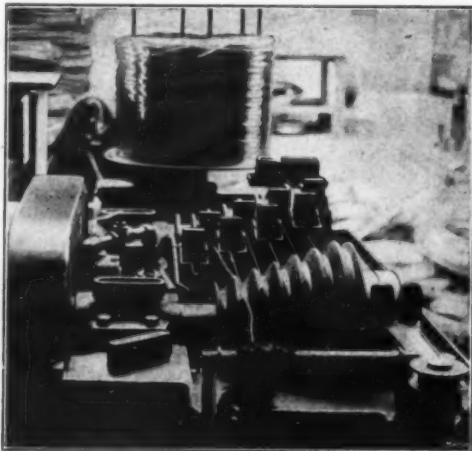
Another Type of Wire Drawing Machine Used for Copper and Brass Wire.
